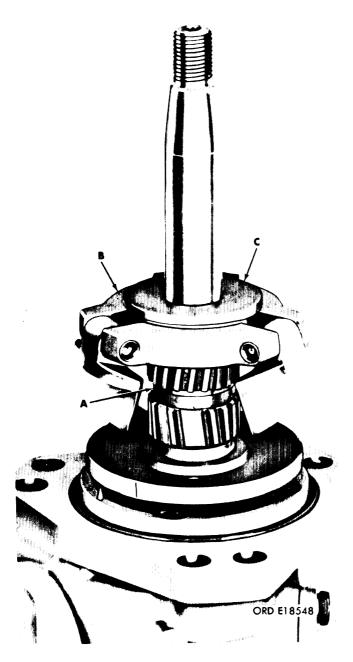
Positioning spider assembly on camshaft prior to checking end play.
